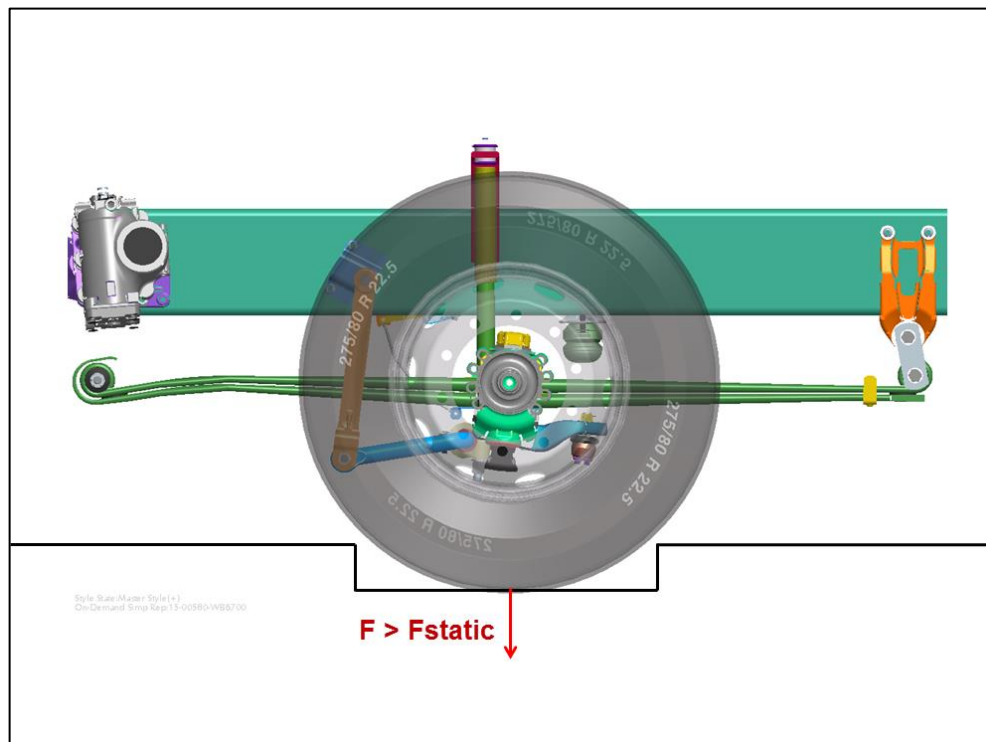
Dynamic vertical load applied to the pavement – F higher than static load.
